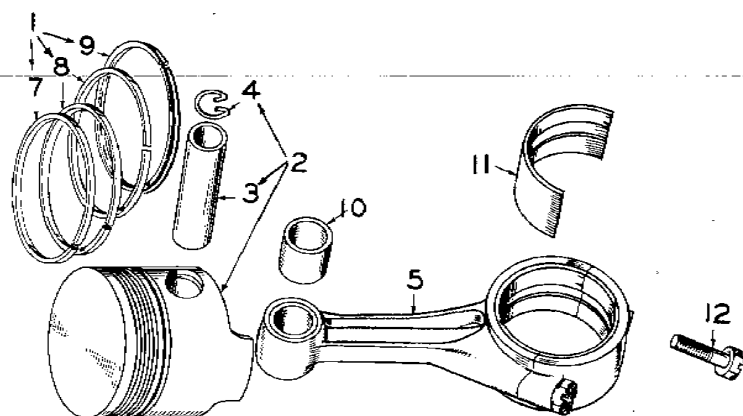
PISTON AND CONNECTING ROD GROUP
